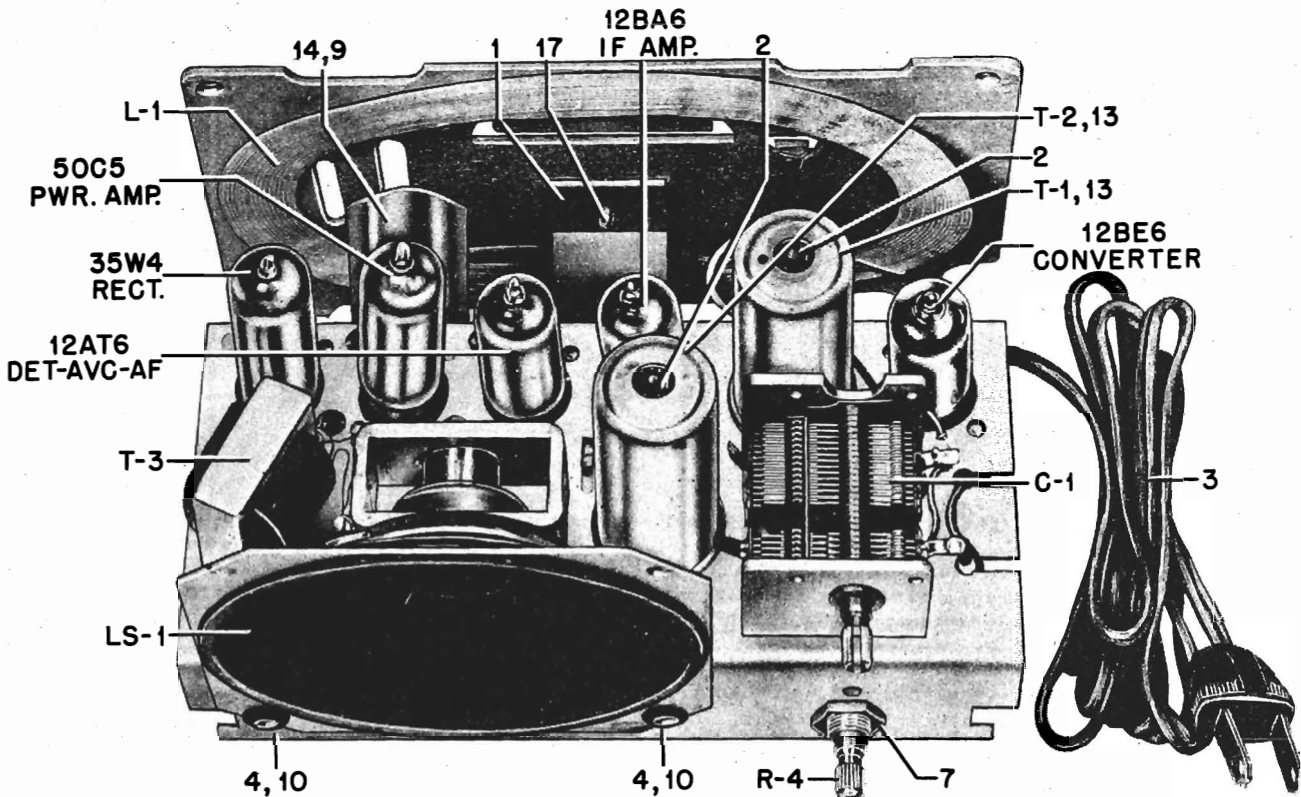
PARTS LOCATION - CHASSIS TOP VIEW
